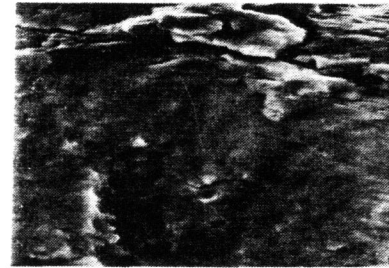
magn. 2000 X. Probable intergranular crack propagation on fatigue fracture of controlled forged rod.
